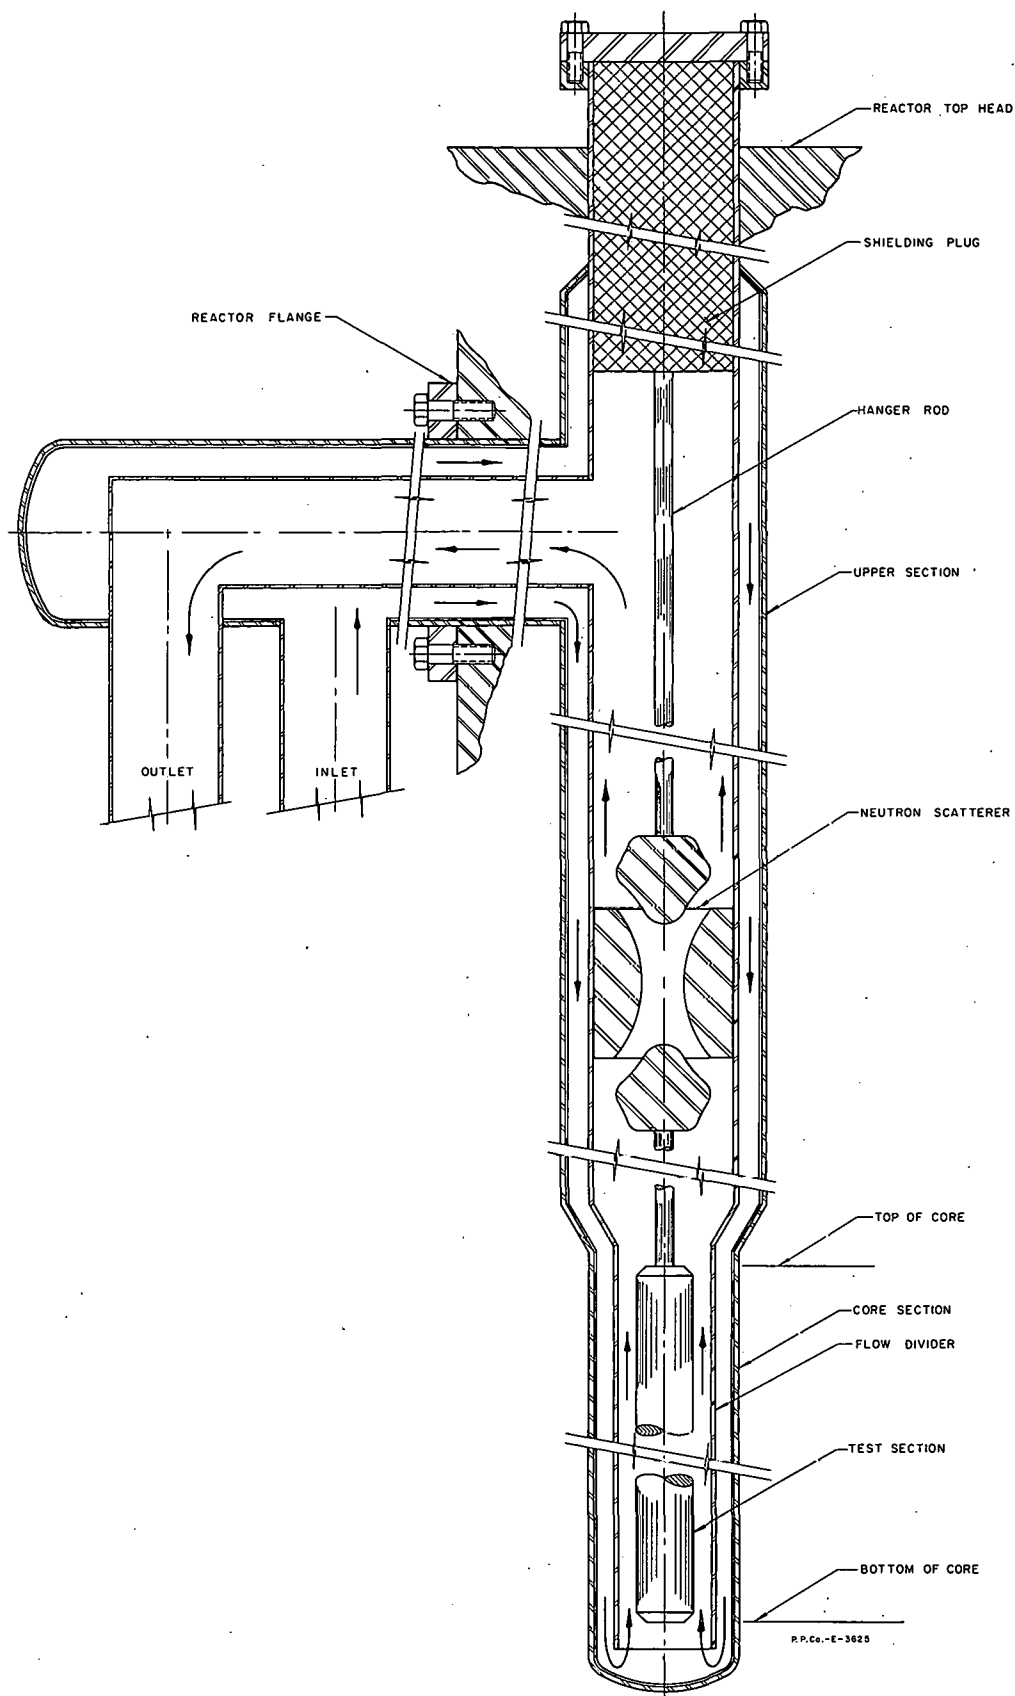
Gas-Cooled Loop In-Pile Tube Assembly
